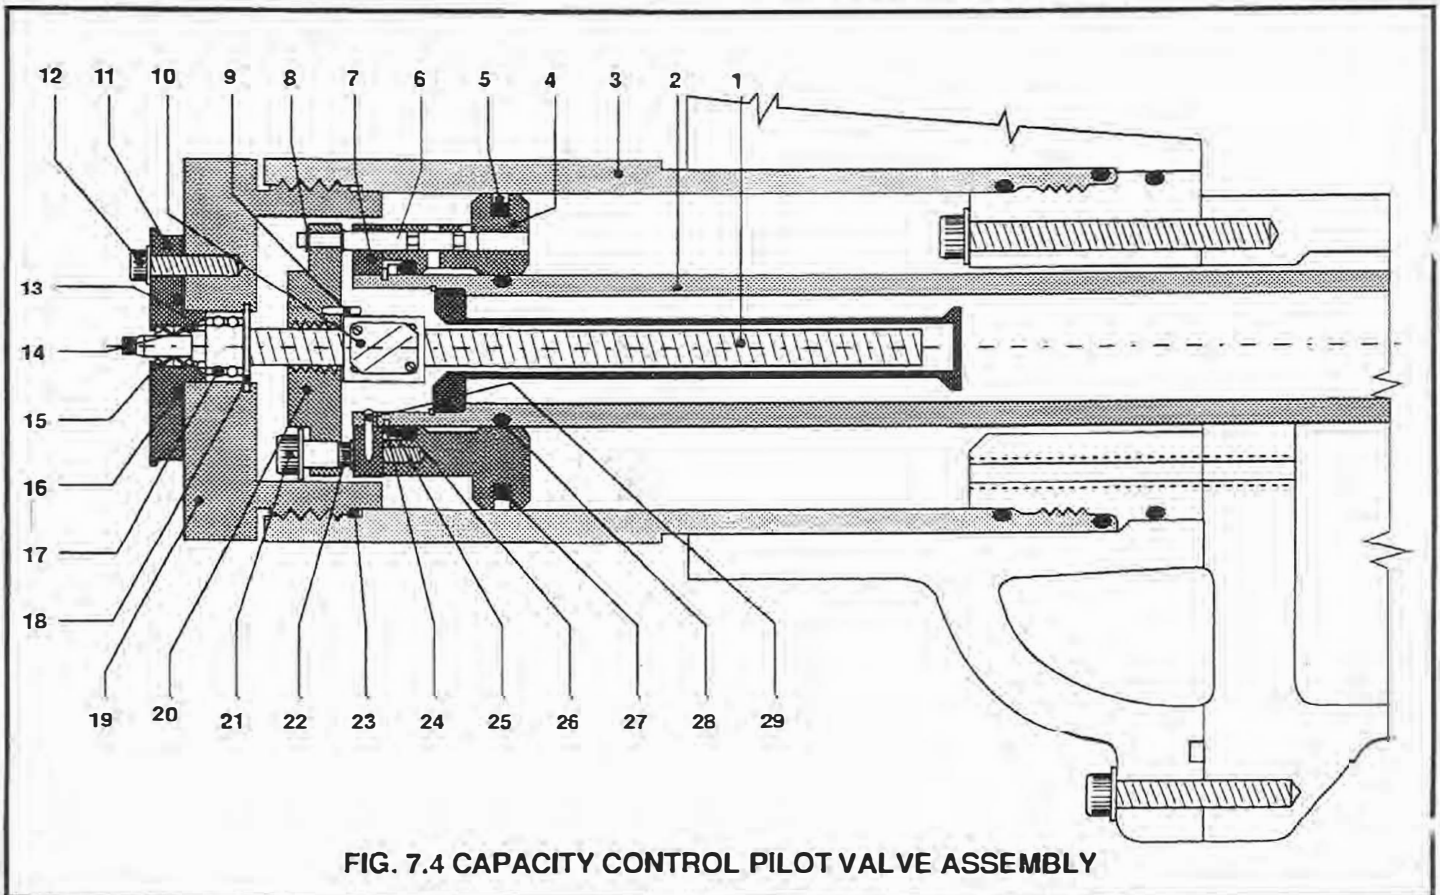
CAPACITY CONTROL PILOT VALVE ASSEMBLY
